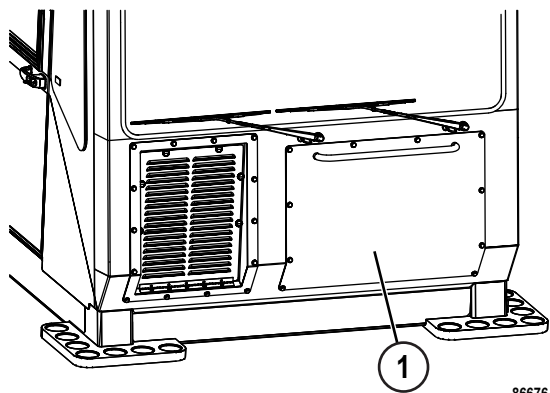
ACCESSING THE WIPER MOTOR
